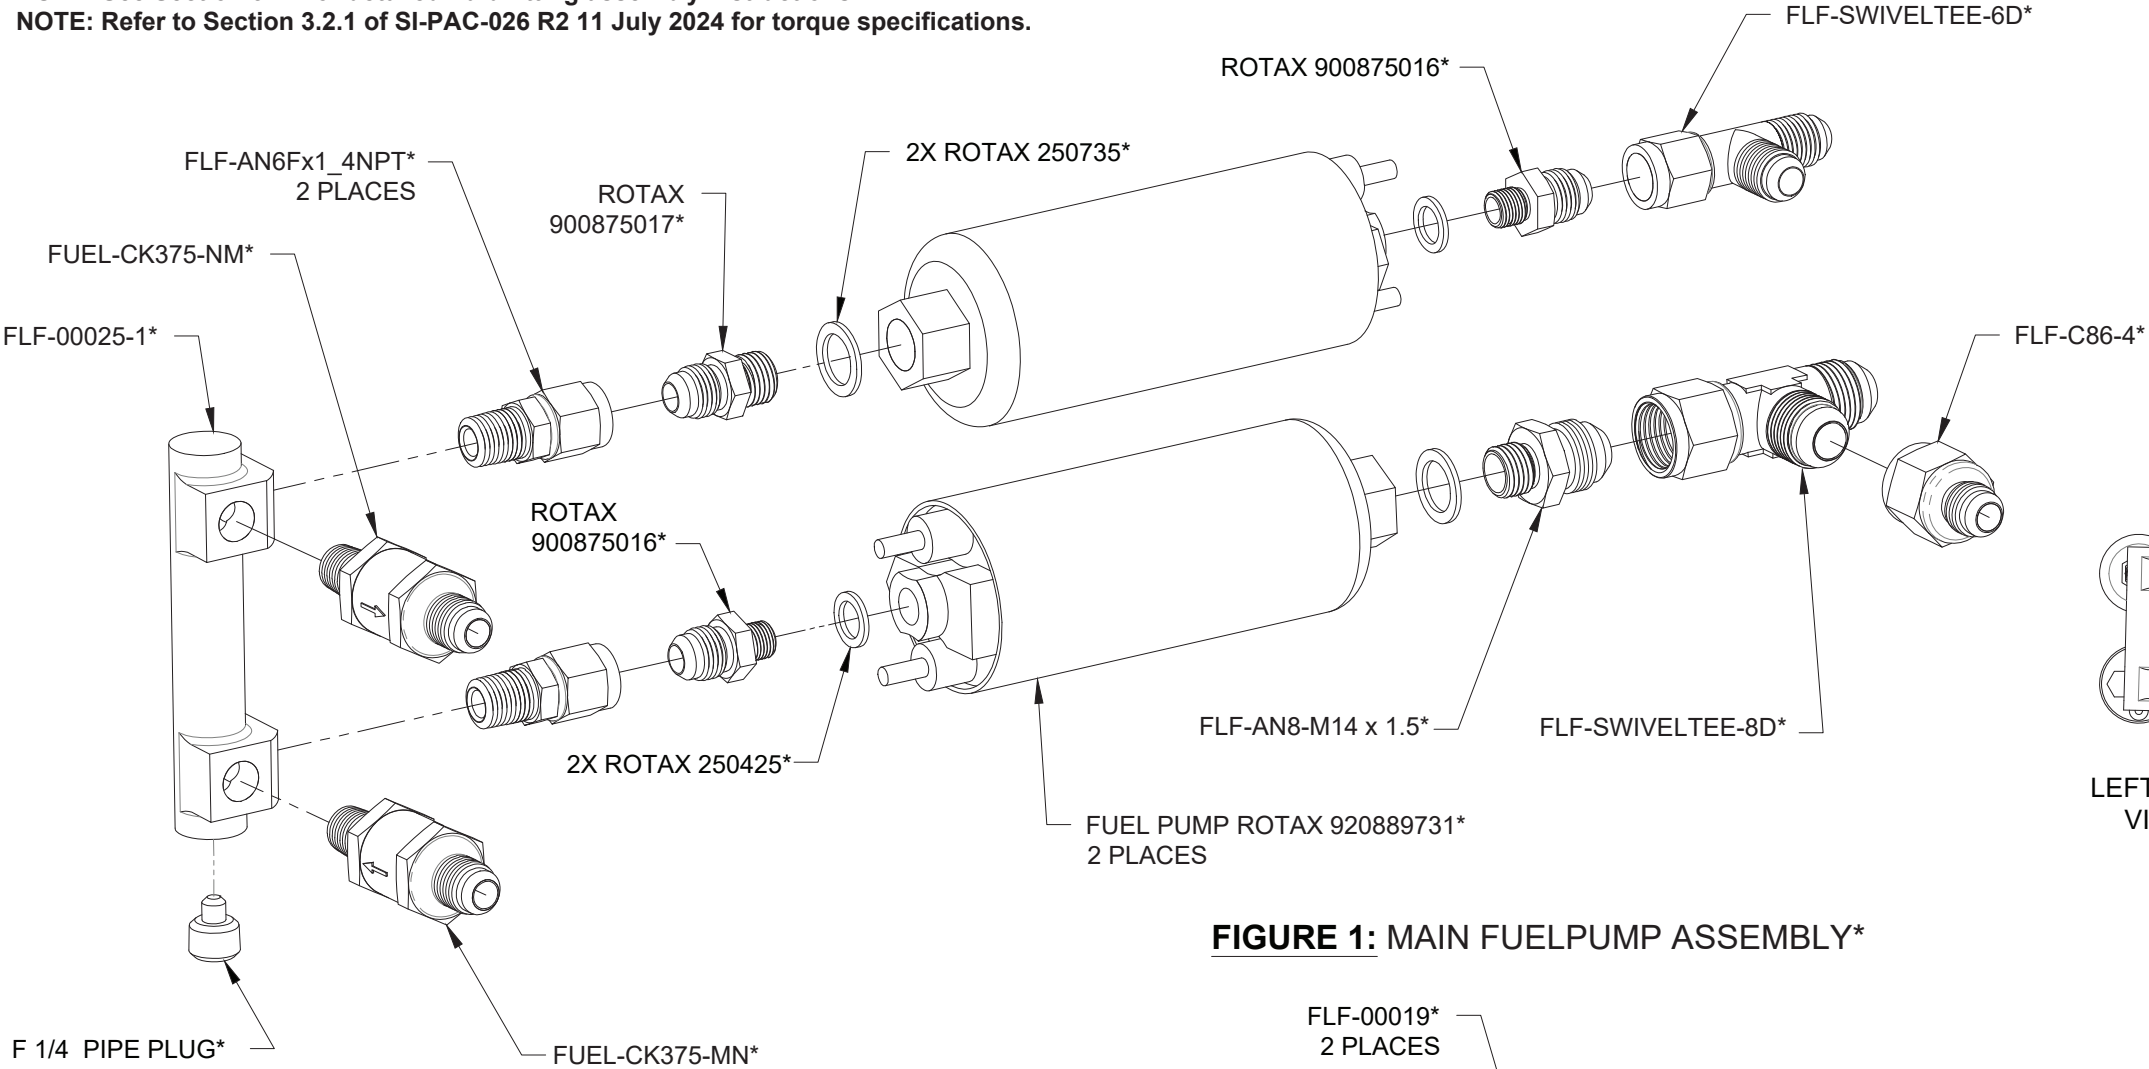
MAIN FUELPUMP ASSEMBLY
